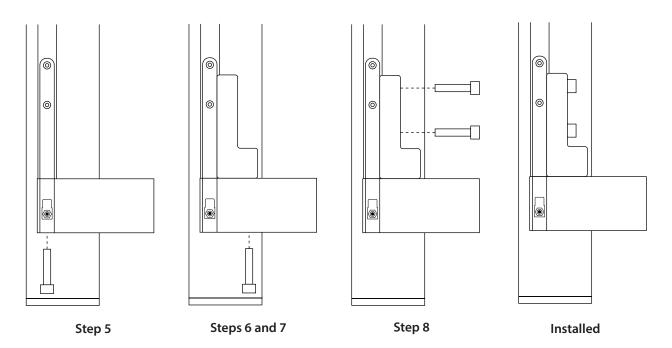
Steps to Install the Screws on the Isolator Probe Holder
